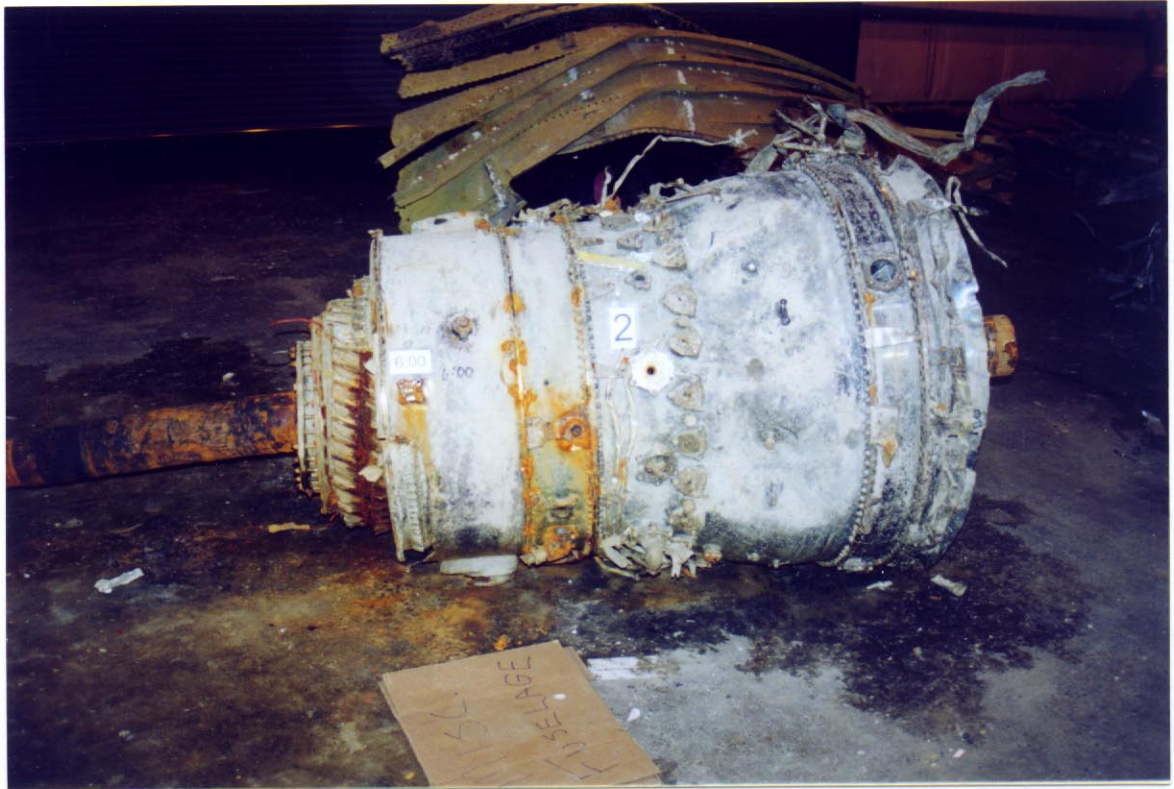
View of left side of No. 2 engine HPC, diffuser/combustor, and HPT cases.
